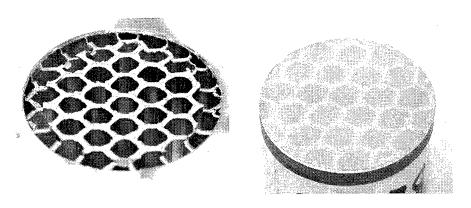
Failure surfaces resulting from tensile testing of the Untreated honeycomb and AF131-2 adhesive control specimen, indicating cohesive fillet bond failure.
